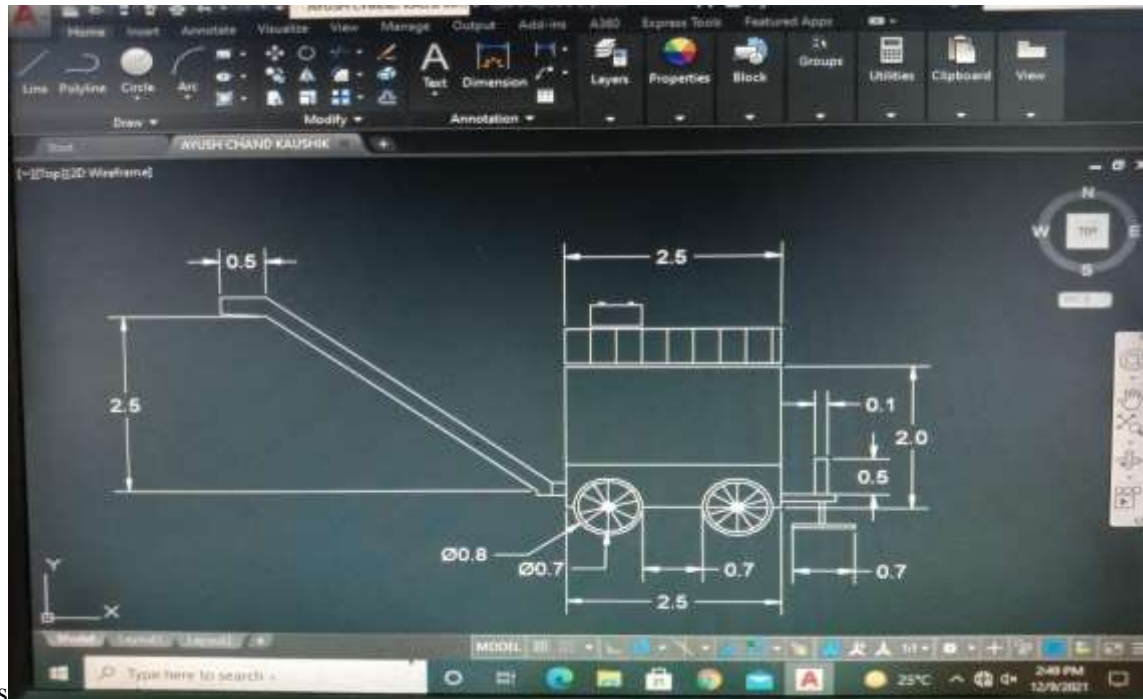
D CAD Model of Hybrid Lawn-Mower Machine.
